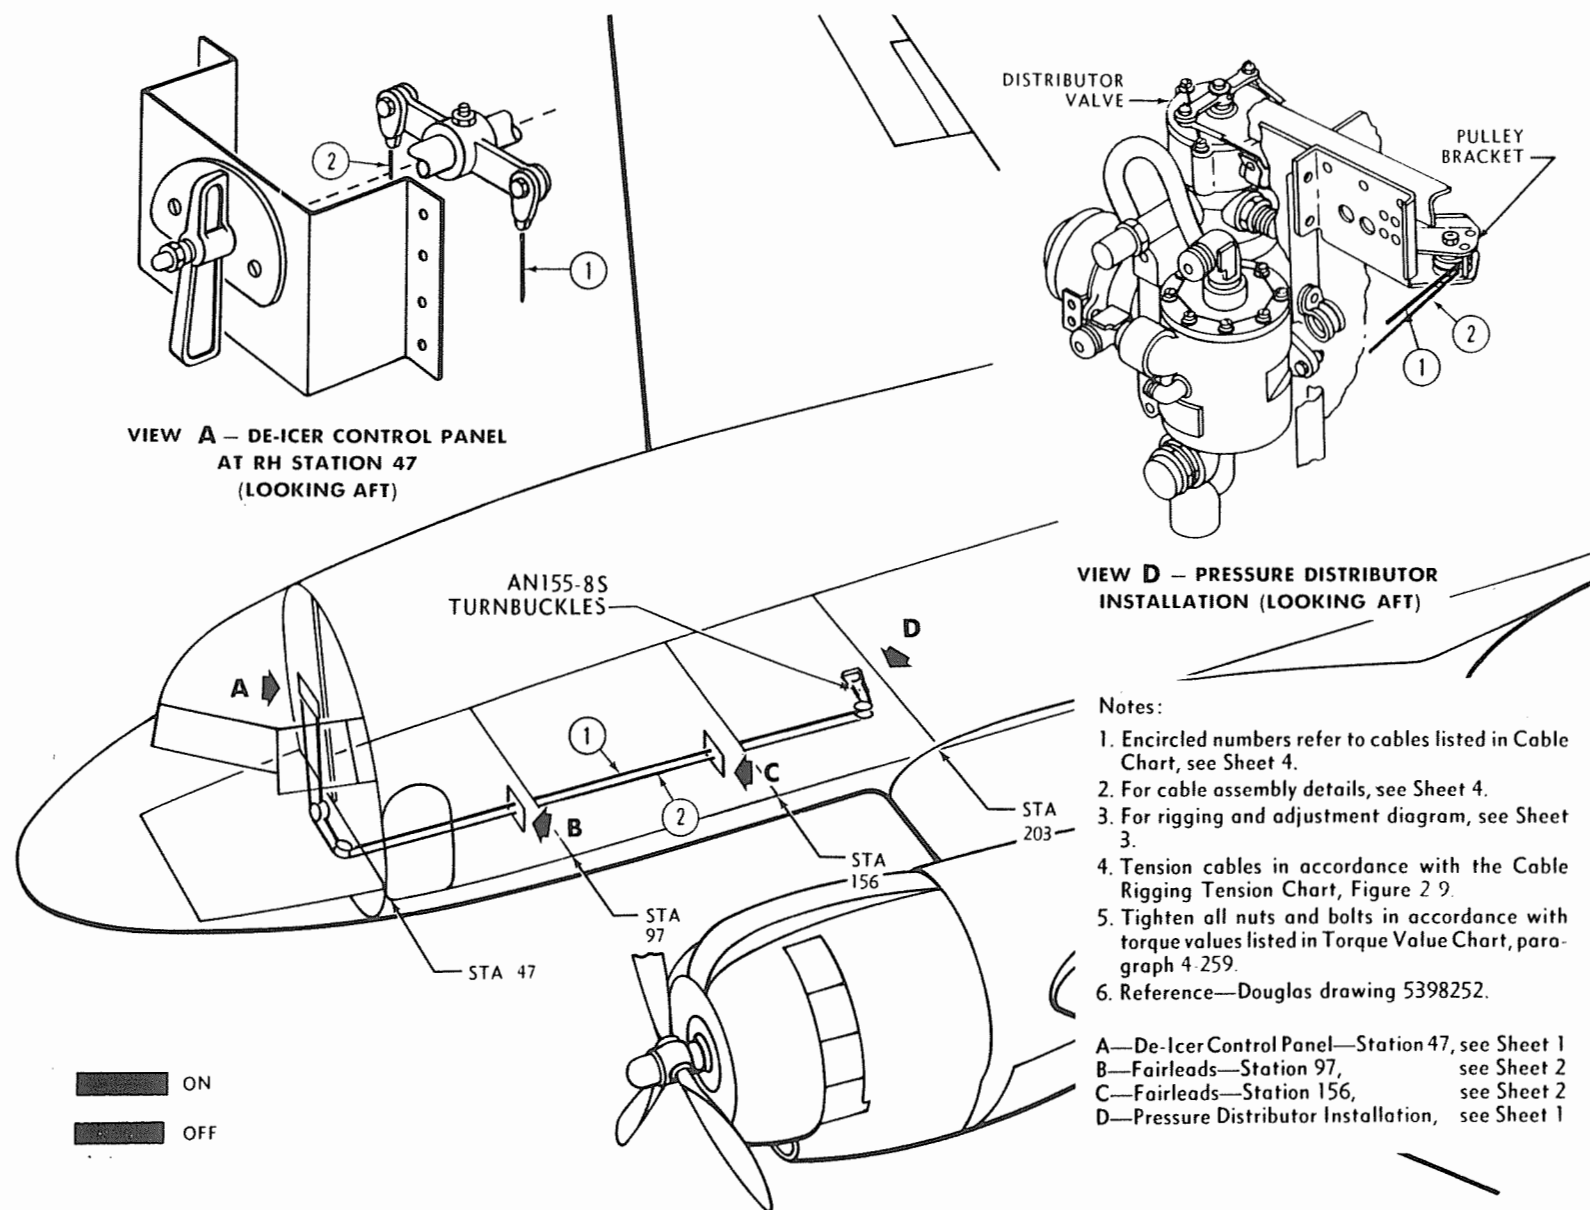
(Sheet 1 of 4 Sheets). Surface De-Icing Control System — Key Drawing
